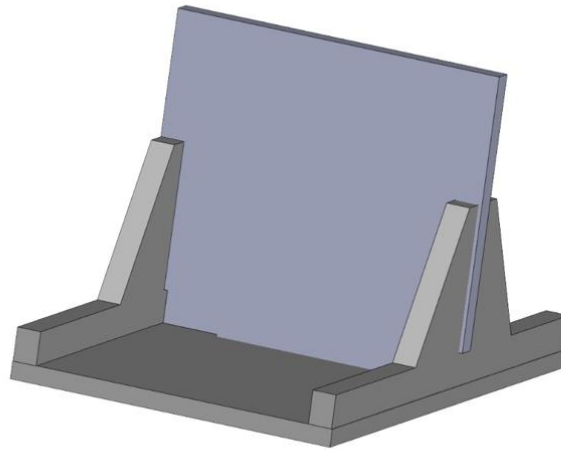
SolidWorks assembly of the intended final product using the parts in Figure 1.
